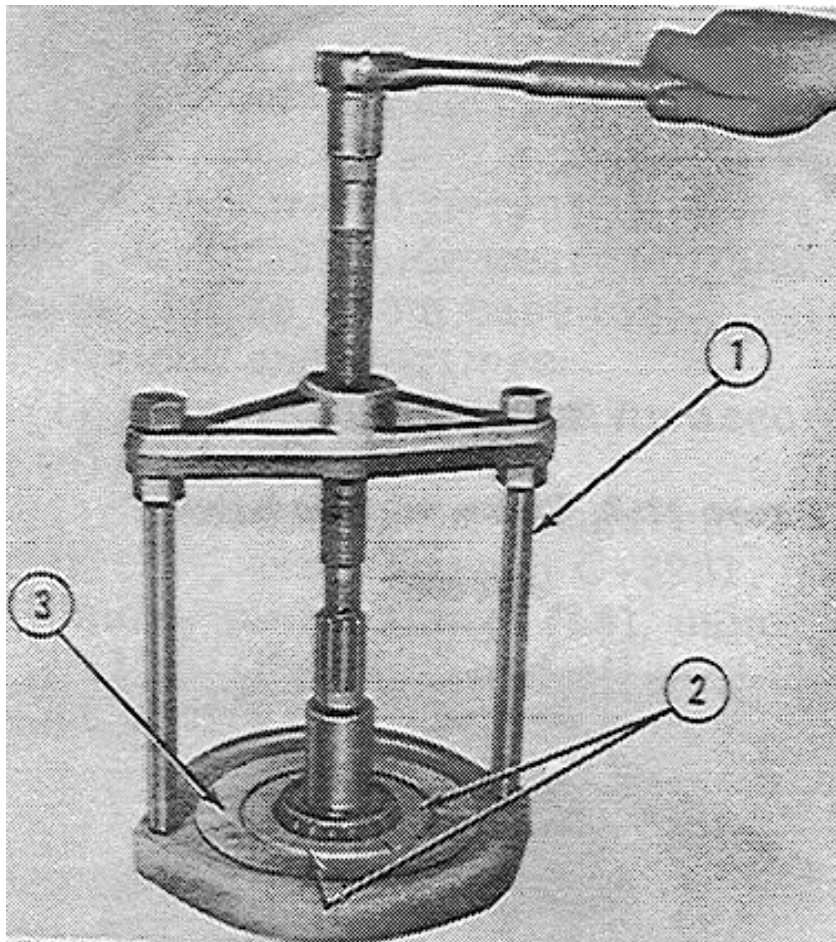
Pinion Inner Bearing Cup Removal
